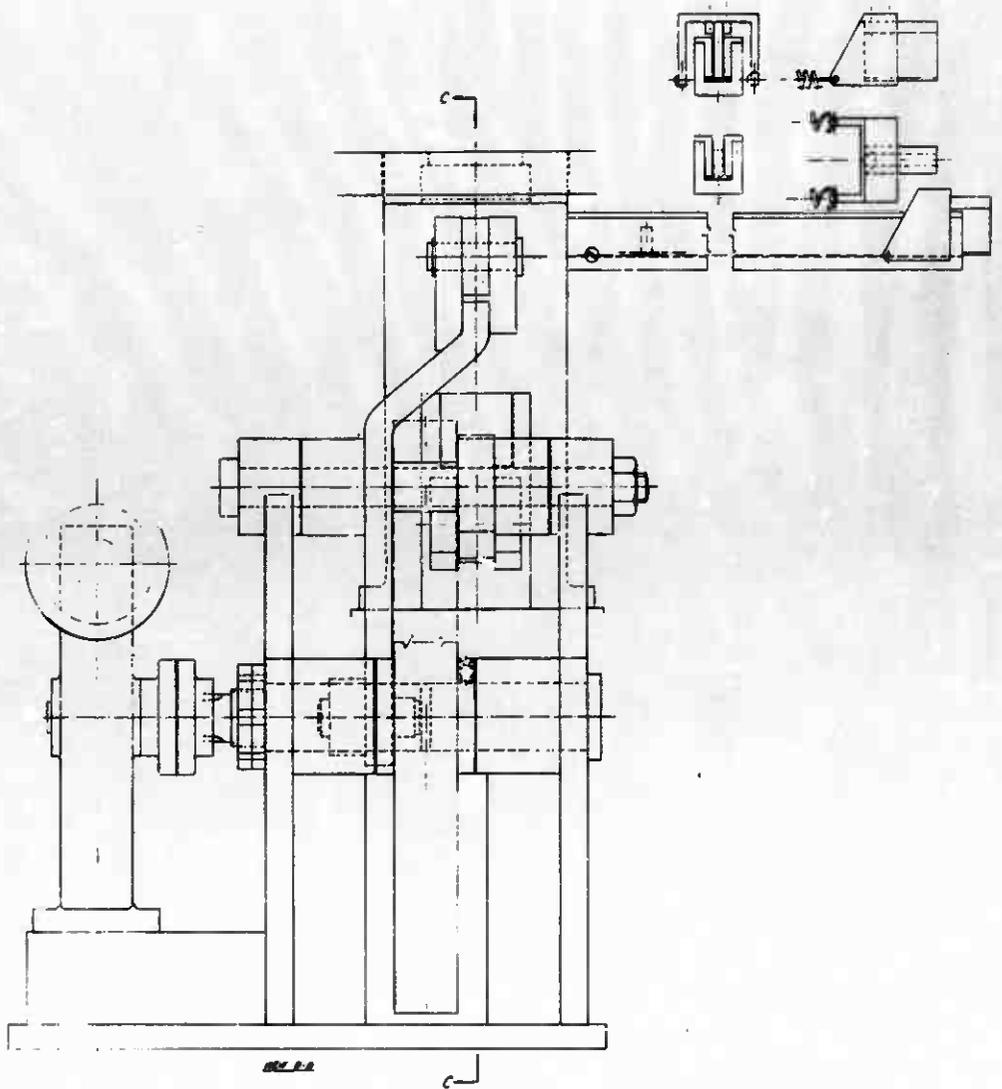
Model AGC-2 Explosive Spot Welding Machine (Sheet 2 of 4).
